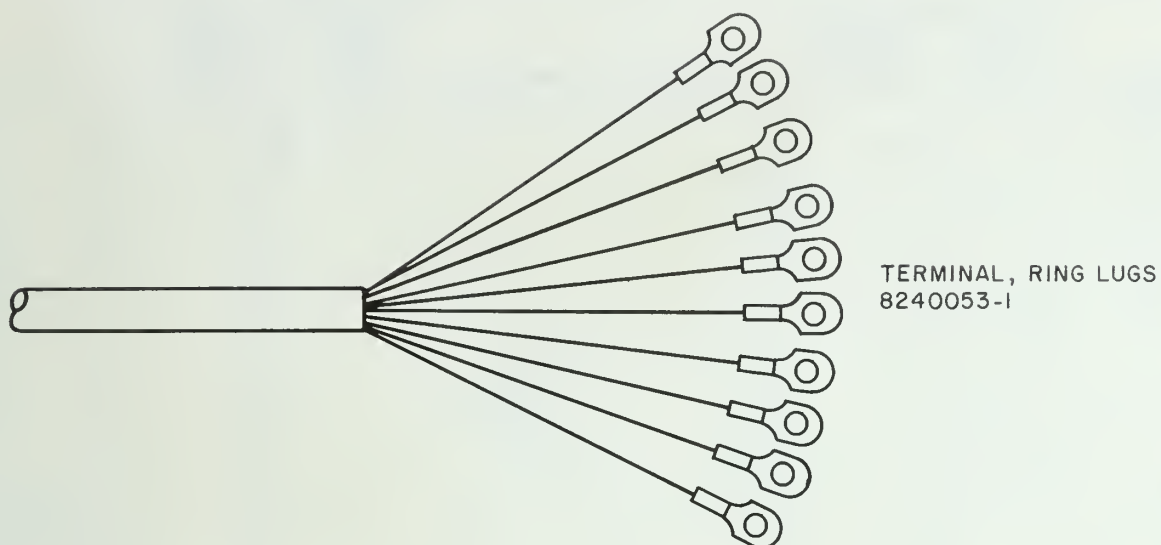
Connector Assembly, WSR-57 Synchro Cable
